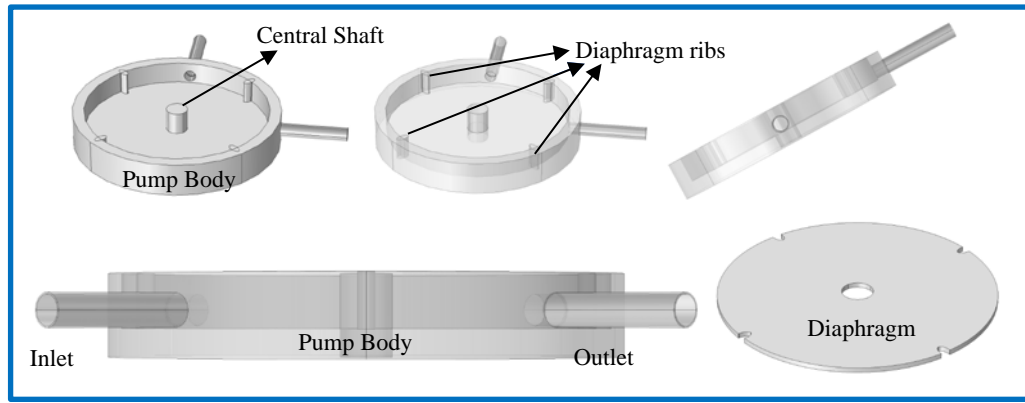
Diaphragm Piston pump design 3D printed at the Medical Devices Center. The inner diameter (ID) of the pump body is 27.71mm and the outer diameter (OD) is 31.13 mm. These dimensions are comparable to a Coca-Cola bottle cap. The overall height is 11.5 mm. The 4 diaphragm ribs around the periphery of the pump body as 9.4 mm high. The diameter of the shaft is 2.16 mm. The diaphragm is 27.68 mm in diameter. The pump body was closed off with a sealed ring (not shown in figure) with a diameter of 31.13 mm and thickness of 2.765 mm. The inlet and outlet both had a 10-mm long extrusion from the pump body and was 1 mm (0.8 mm) [OD (ID)].
